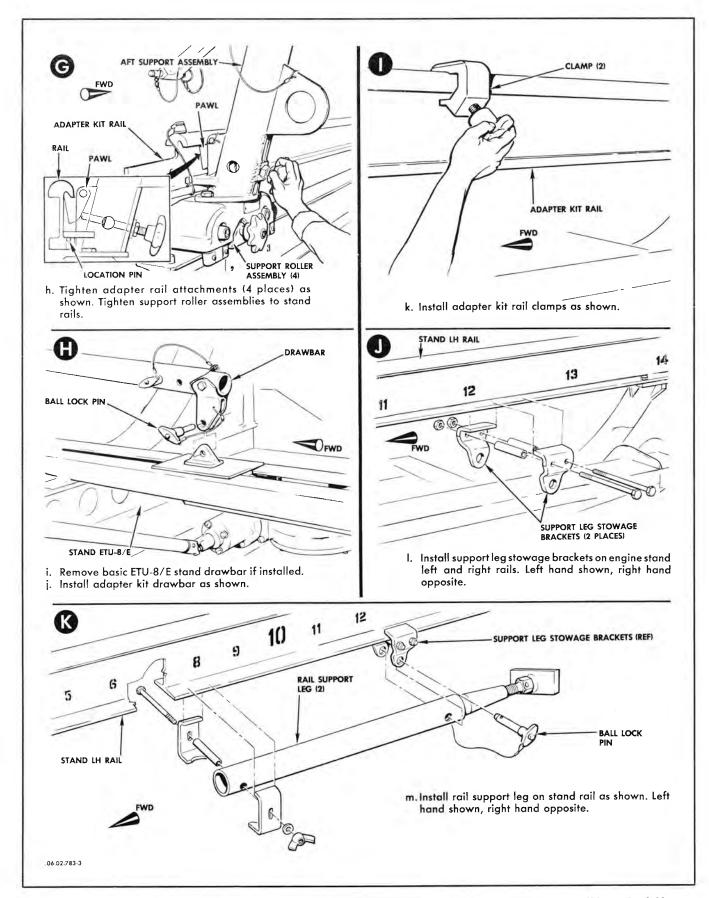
Engine Stand Preparation, Type USAF ETU-8/E Using Adapter Kit 8-96398 (Sheet 3 of 3)
